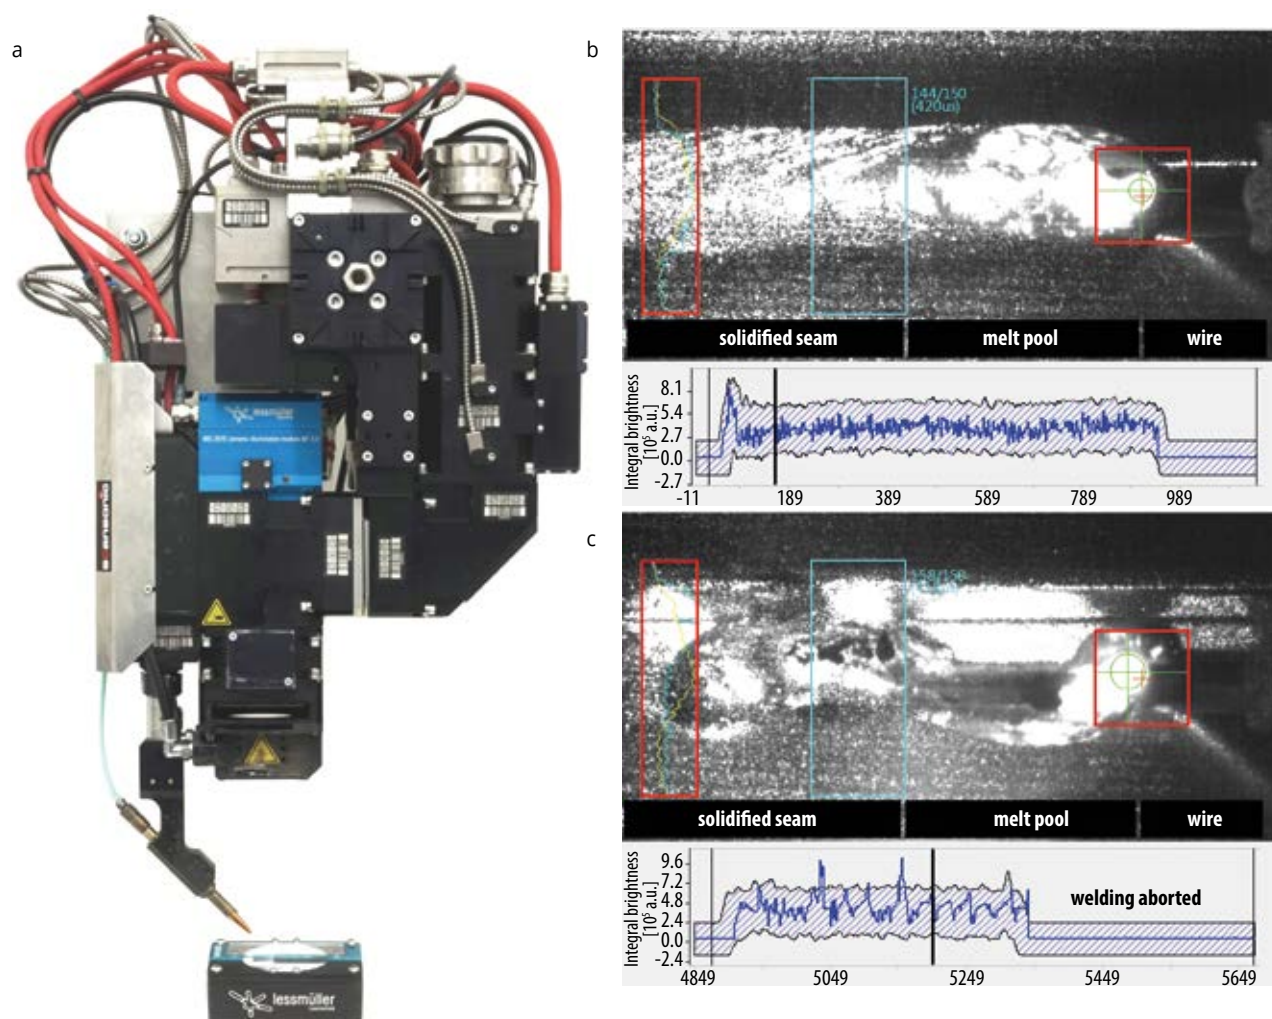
Scansonic ALO3 welding optics with integrated WELDEYE LM7 system (cyan module in a). Online quality assurance during the welding of the battery housing: camera images and corresponding evaluation diagrams show good quality weld (b) and faulty weld (c). In the red quadrangular frames: if the measured brightness distributions of the current welds (cyan curves) do not match those of the reference welds (yellow curves), the weld is signaled as faulty. In the red squares: the green crosshairs point to the processing location. Diagrams show the variation of the integrated process emission brightness over welding time. The hatched areas on the diagrams show the ranges of allowed values of the test parameter.
